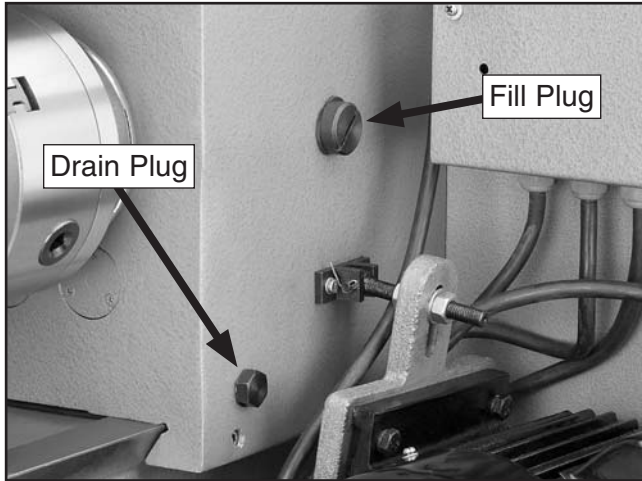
Gearbox fill and drain plugs, as seen from the rear of the lathe head.
